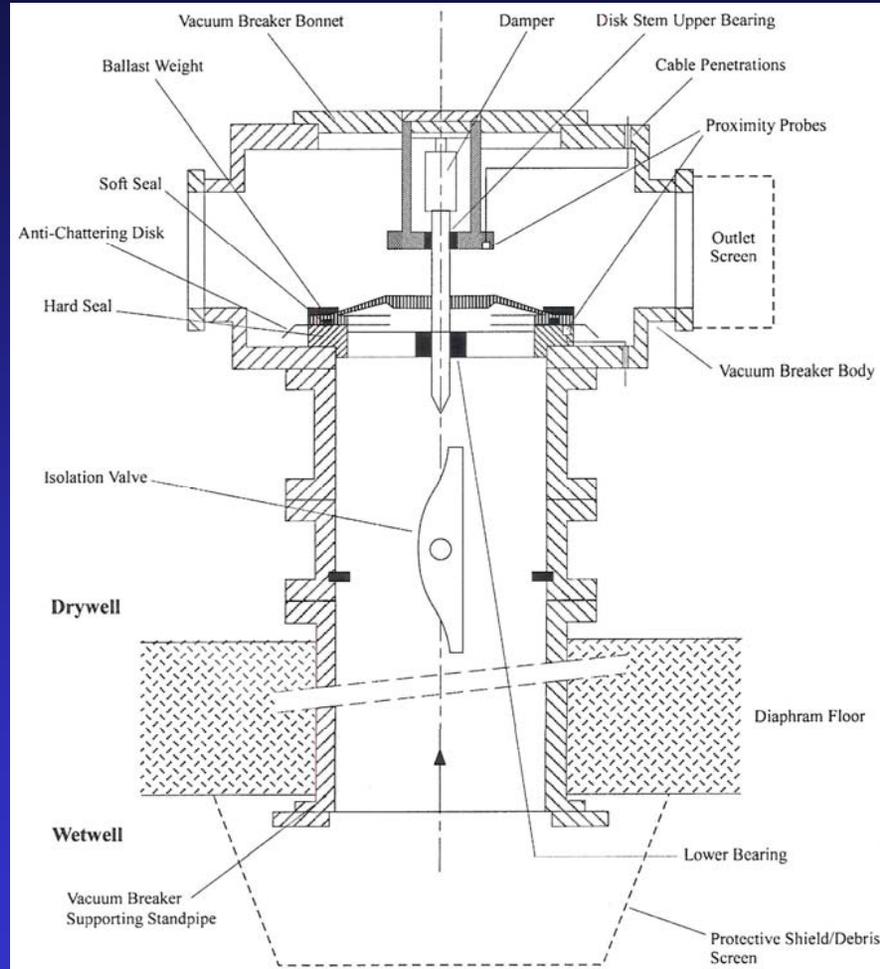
Wetwell-to-drywell vacuum breaker (DCD Figure 6.2-28)
